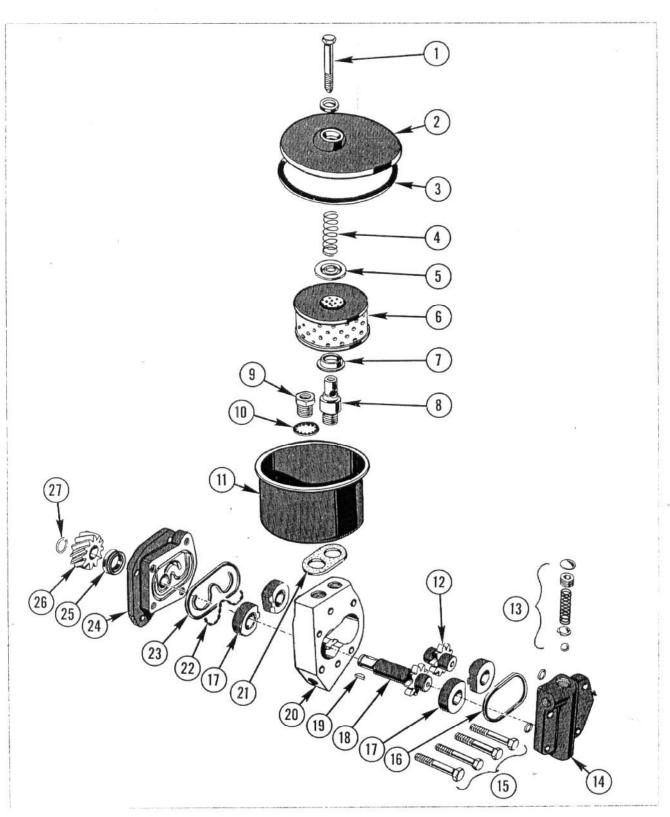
EXPLODED VIEW OF ENGINE-DRIVEN STEERING PUMP — GAS
